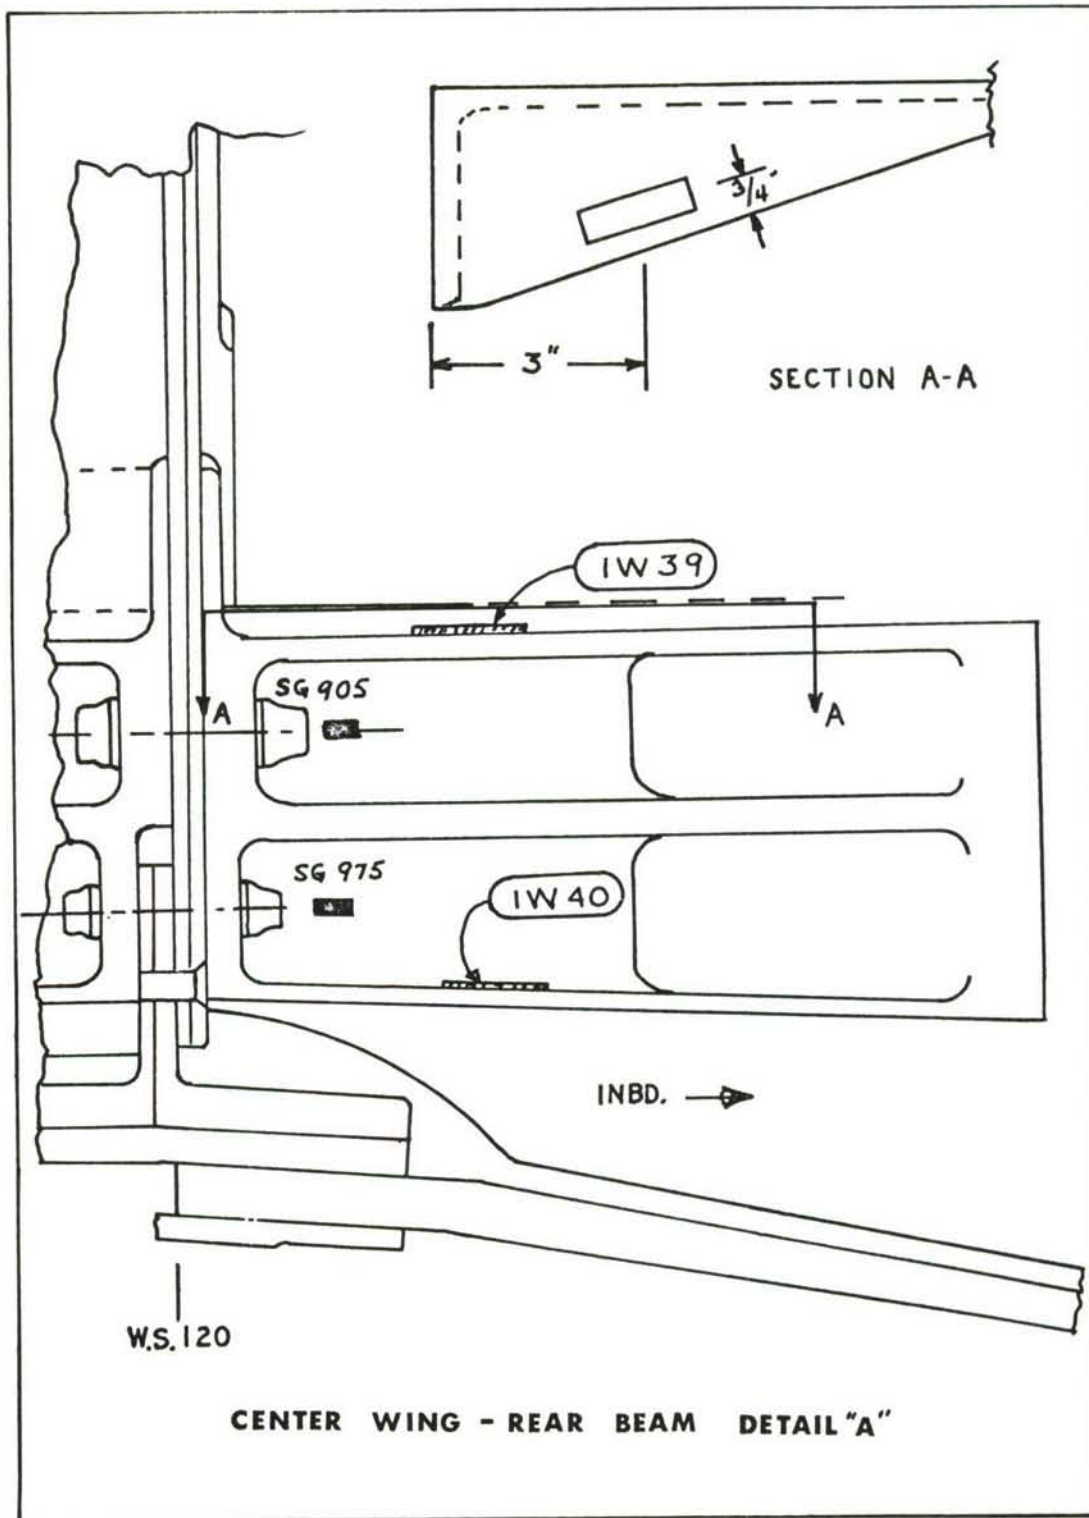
DETAIL OF STRAIN GAGE AND SENSOR LOCATIONS ON THE REAR BEAM ATTACHMENT FITTING
